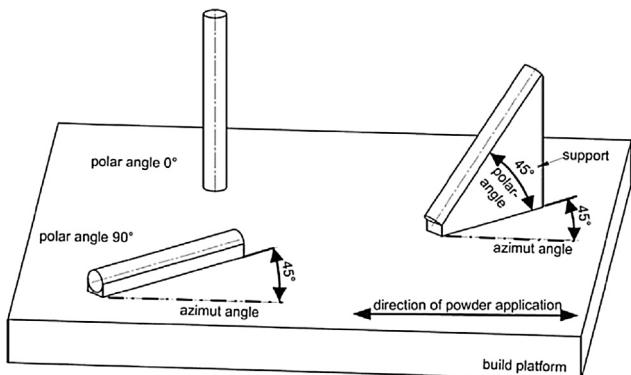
Setup of VDI 3405 inter-laboratory test for LBM 1.2709.
